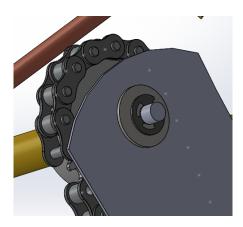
The retaining ring at the end of the top shaft prevents the cantilever-beam structure of the sculpture from shearing excessively.
